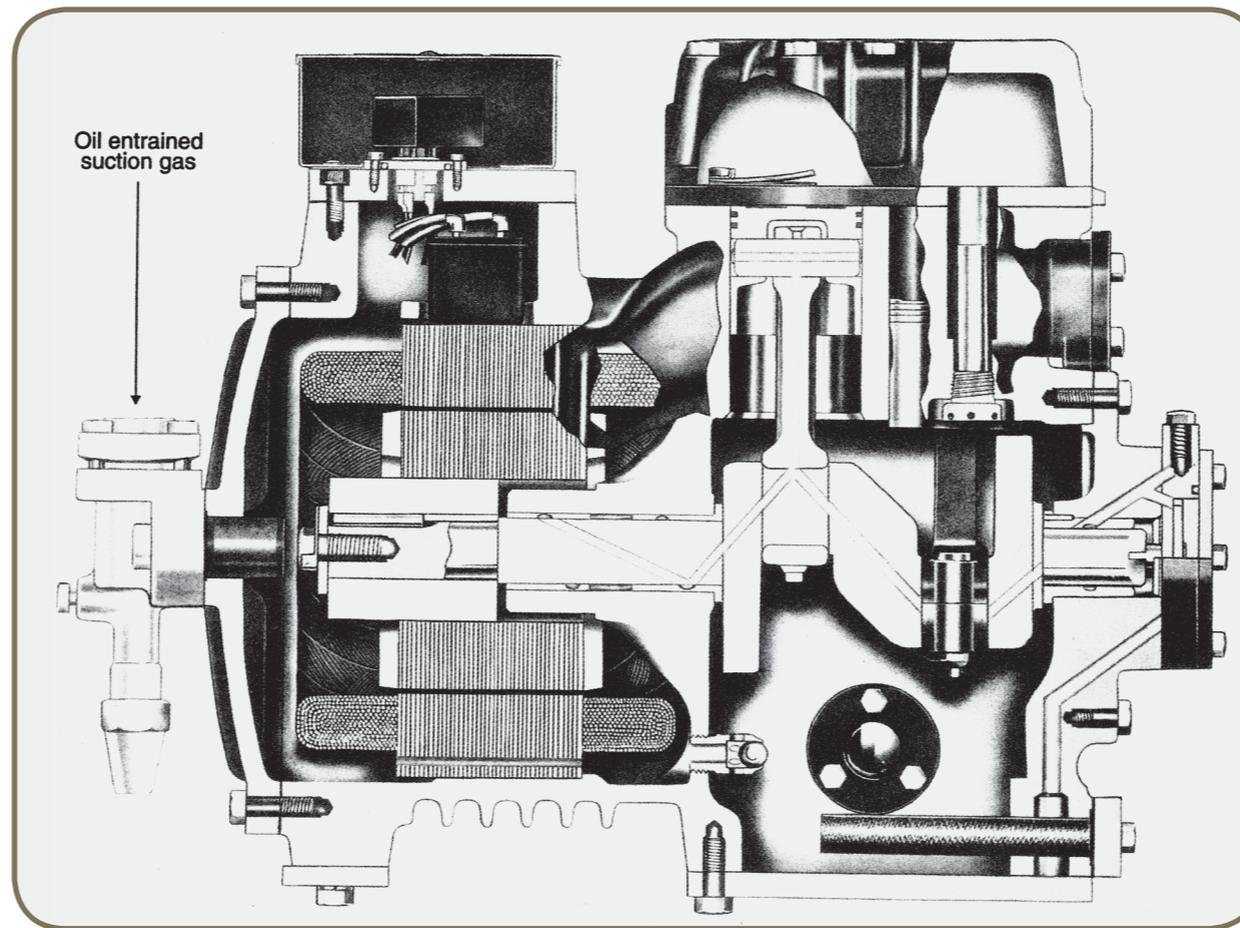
Cut-away of a semi-hermetic compressor incorporating an oil pump and drilled oil passages through a crankshaft. (Courtesy of Emerson Climate Technologies.)
